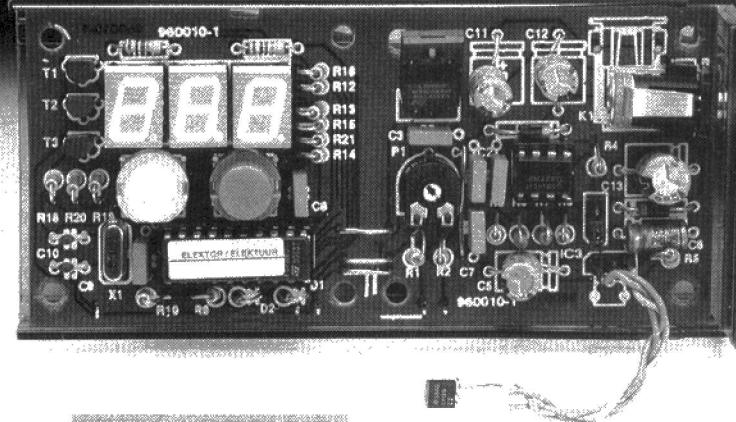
Completed prototype of the digital maximum and minimum thermometer.
